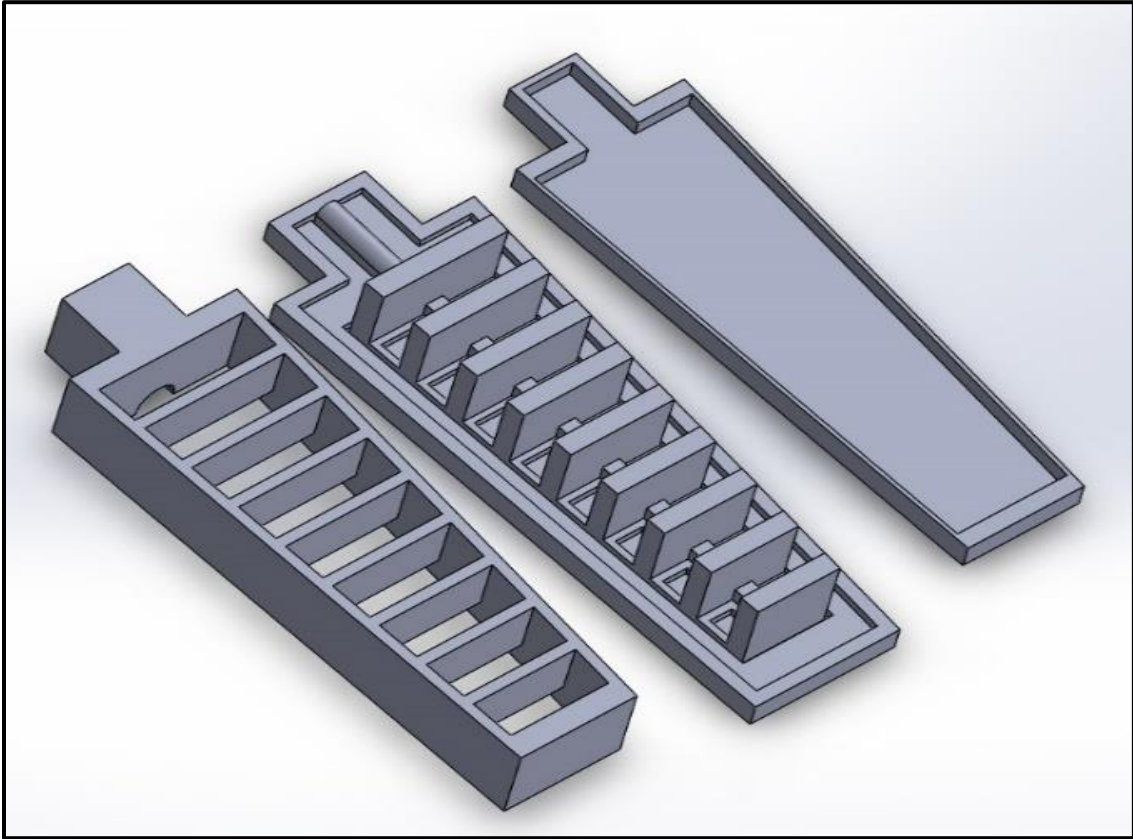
SolidWorks Design mold for $\theta = 3^\circ$.
